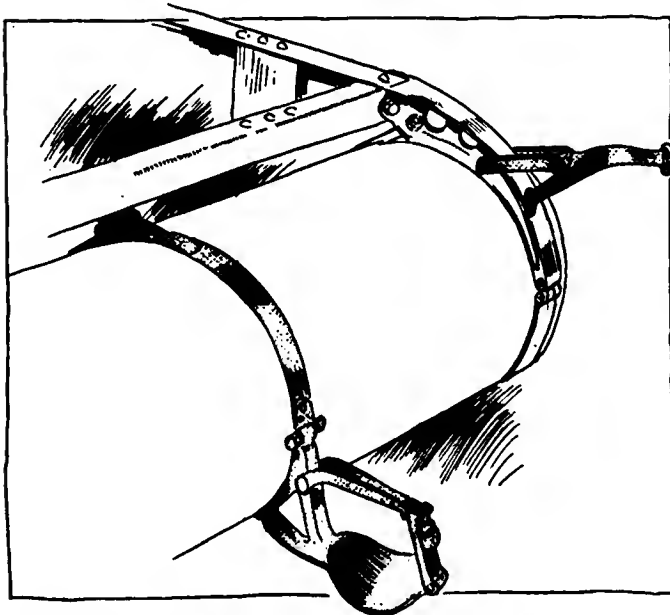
Method of attaching tire carrier to tank on Edwards-Knight
